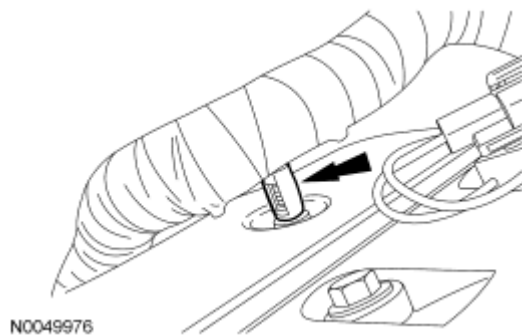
Detaching Wiring Harness From RH Coil-On-Plug Cover Stud Bolt
